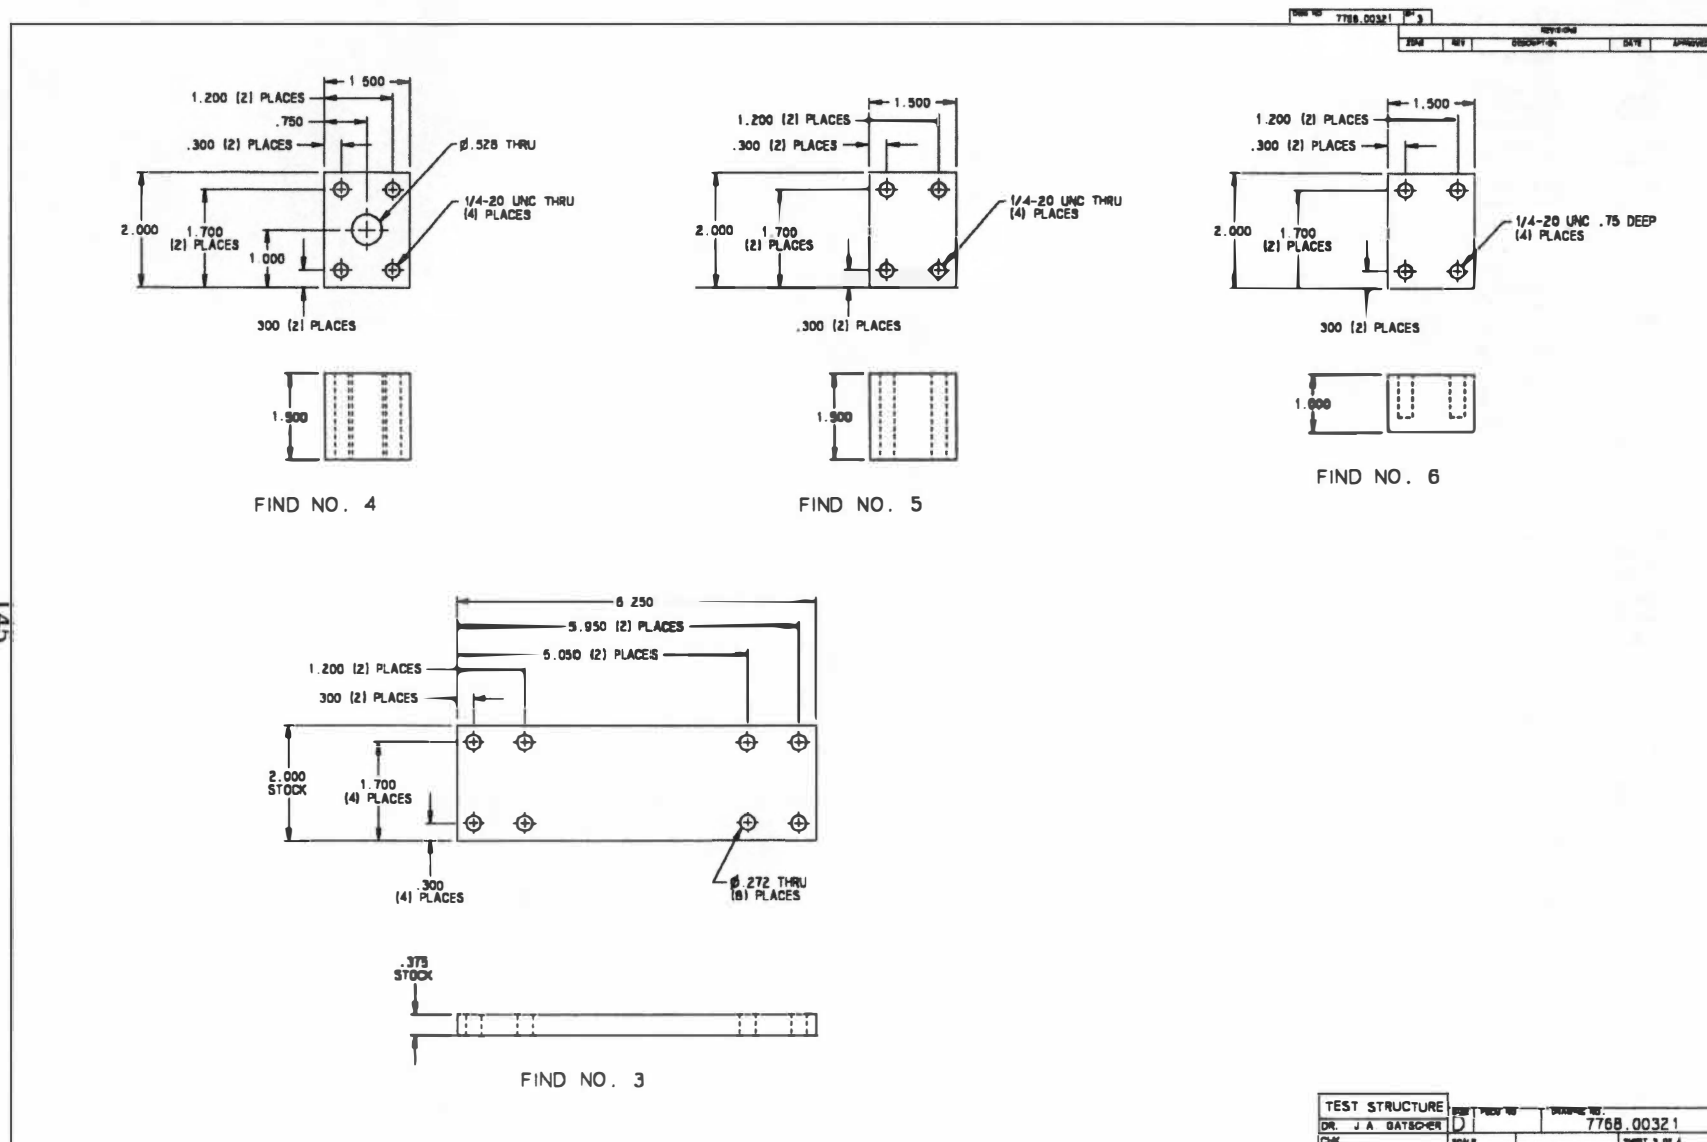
Fabrication drawing of beam and block test structure - sheet 3.
